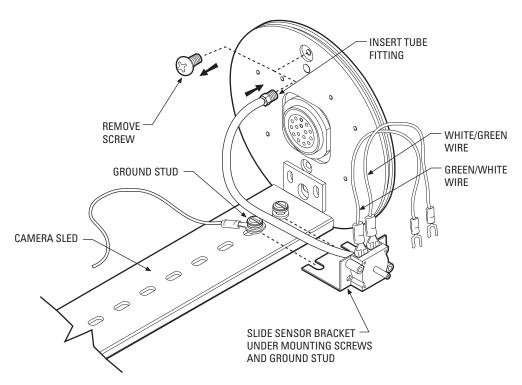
EH8100 Series Enclosure - Rear Plate, Inside View
